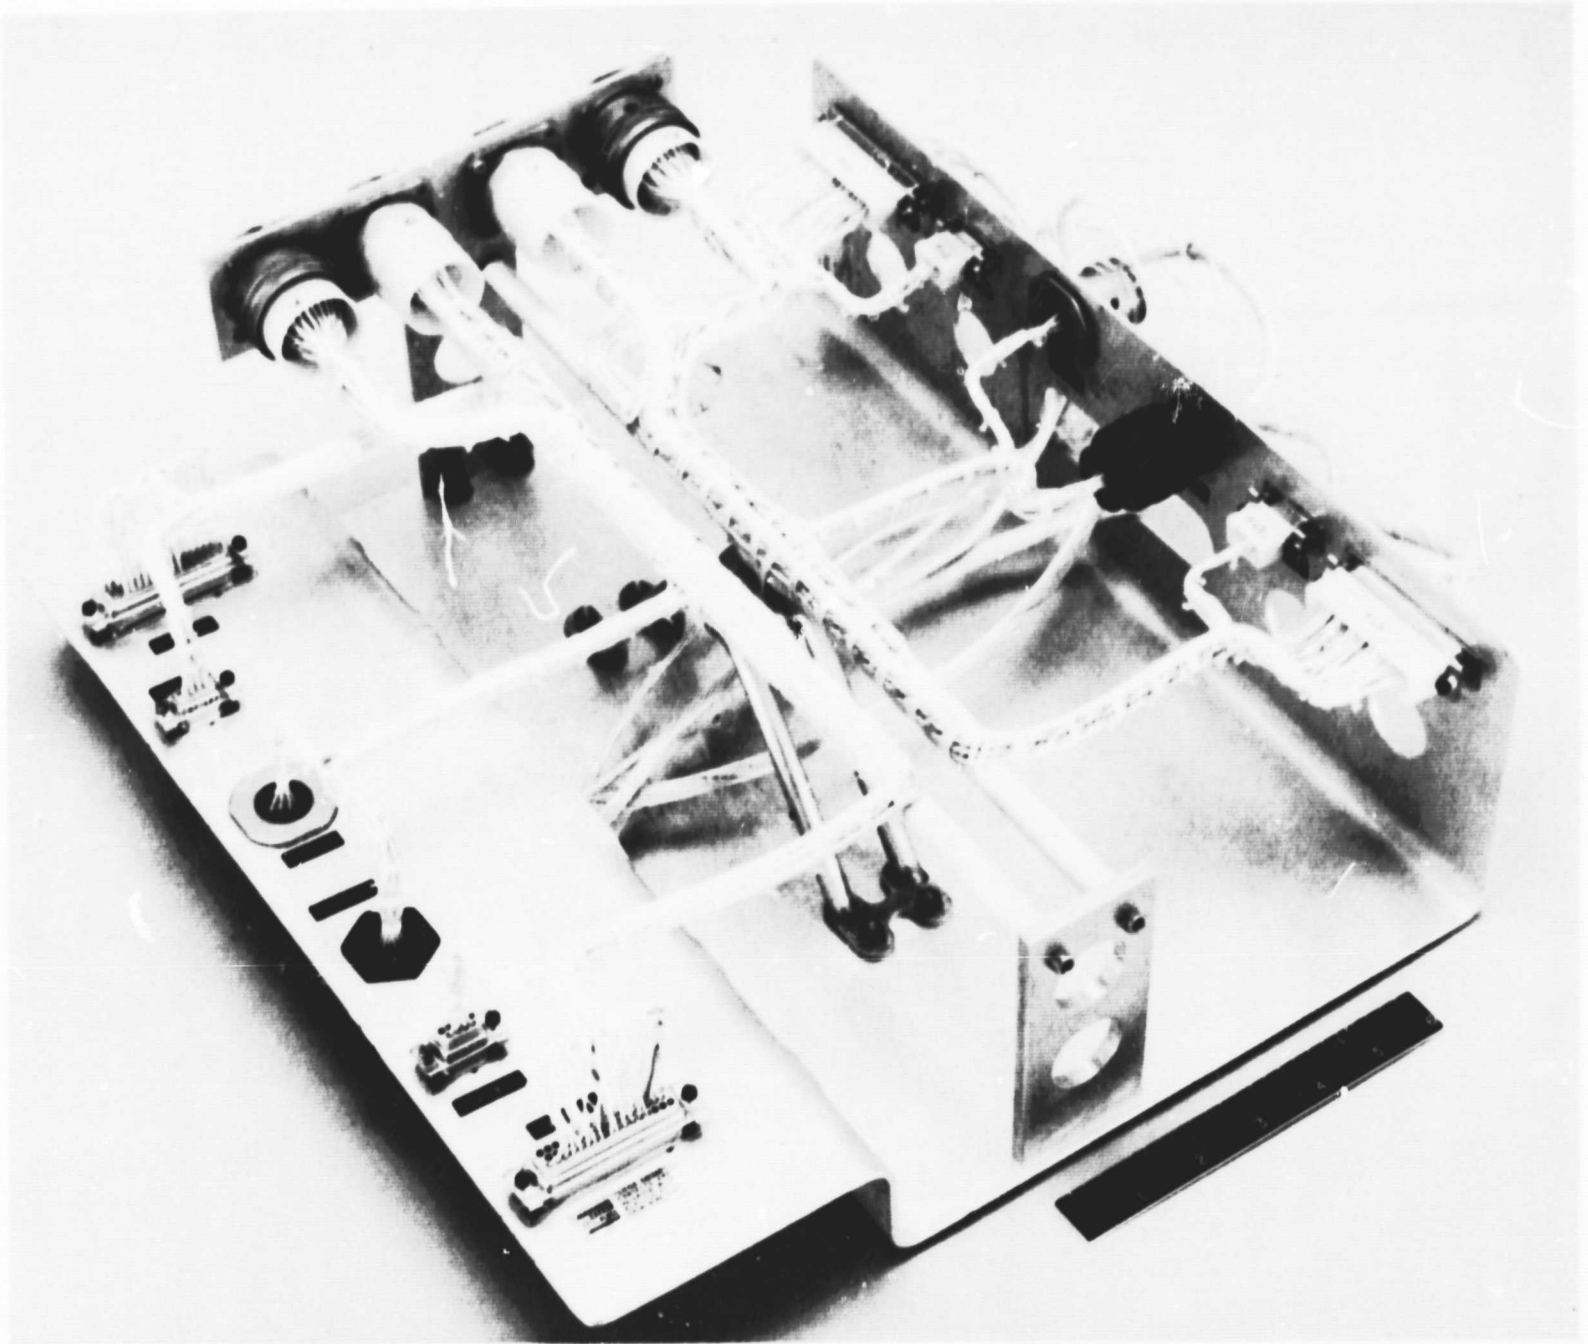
Typical Harness and Fixture Assembly Simulating a
